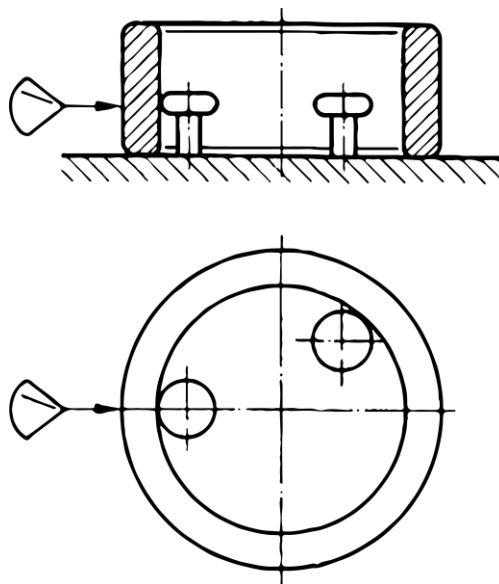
Standardized bearing ring thickness measurement setup (DIN 620-1, p. 4)
